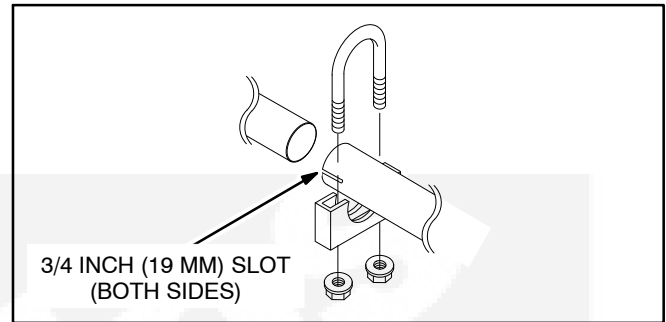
EXHAUST TAIL PIPE CONNECTIONS
